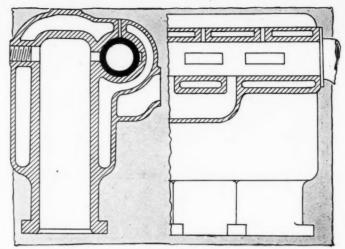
Sectional views of Von Bottweiler motor, showing rotaryvalve arranged alongside of cylinders
